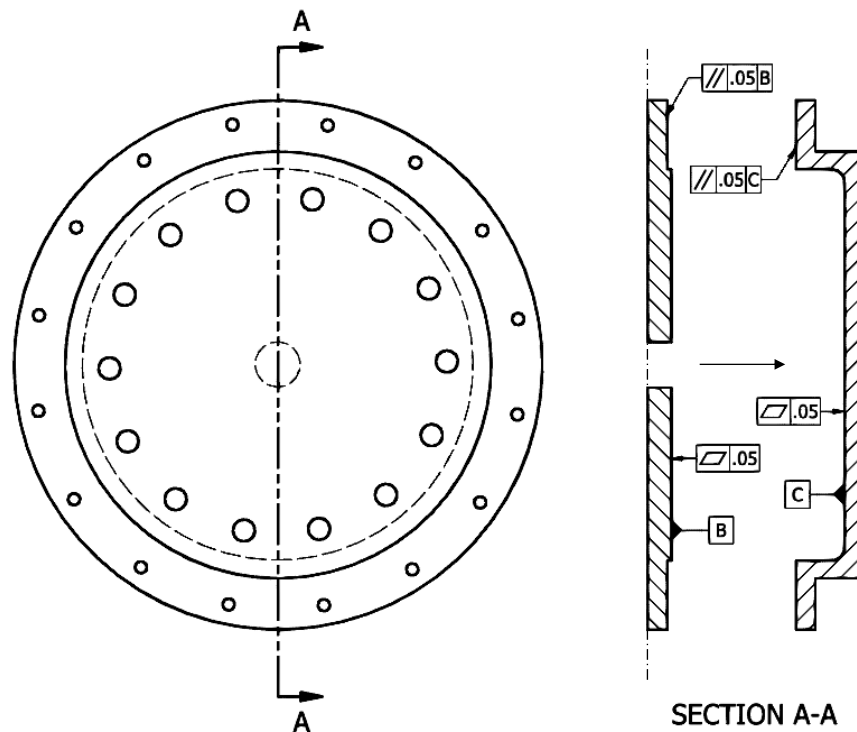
Front view and cross section of the exploded plenum assembly. Flatness and parallelism tolerances.
